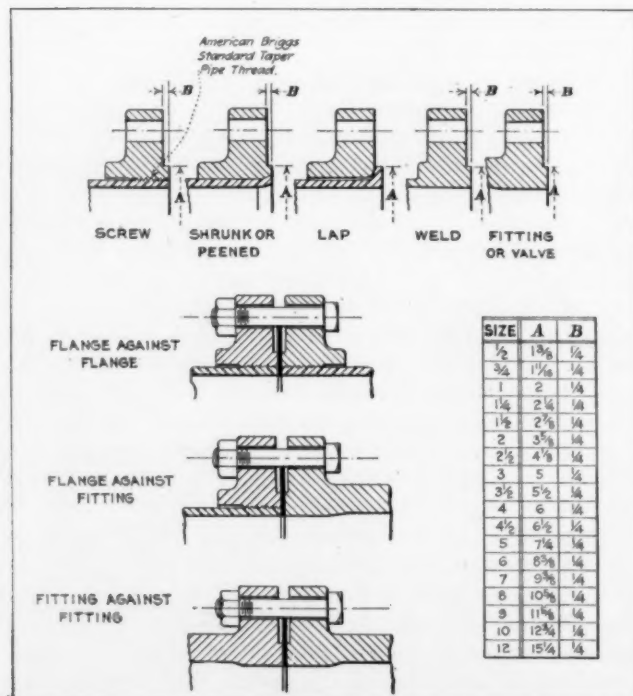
FLANGE JOINTS AND METHODS OF ATTACHING FLANGES TO PIPE, 800-LB. AND 1200-LB. HYDRAULIC AMERICAN STANDARD
